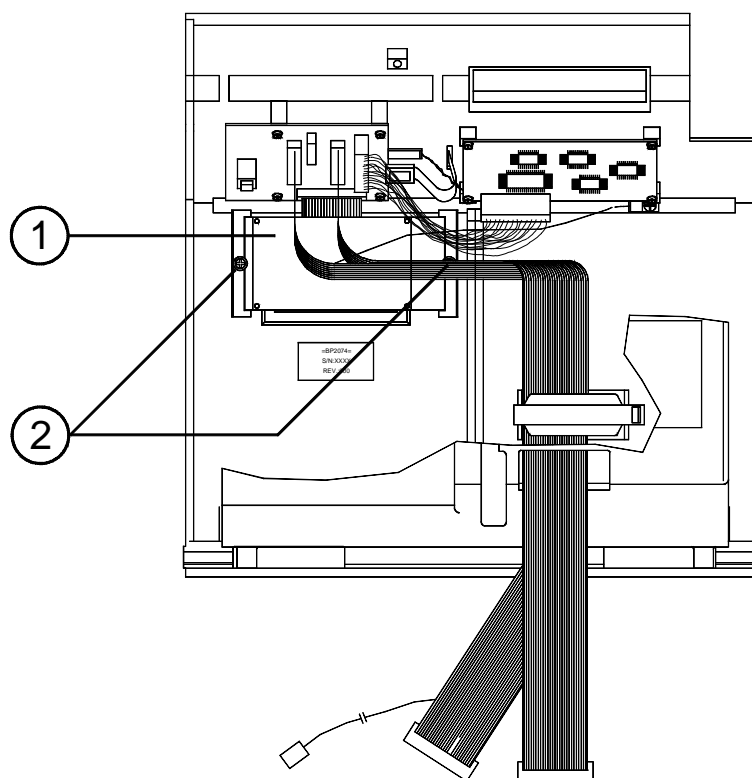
Inside cover view / cover removed (AVL COMPACT 3)
